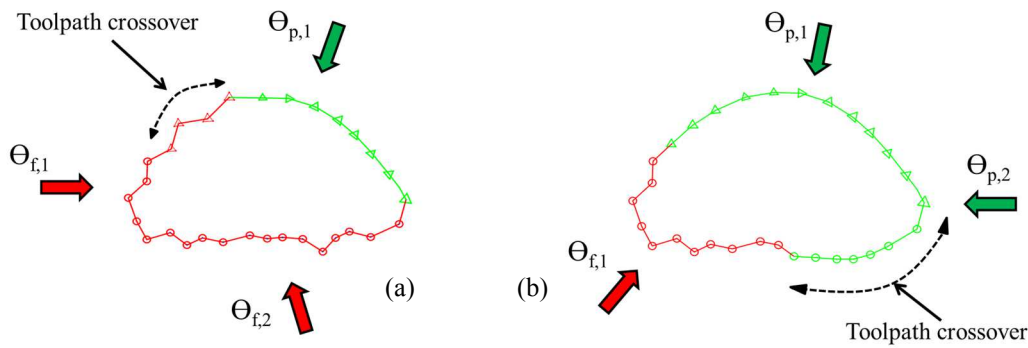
Illustration of tool path crossover (a) tool path crossover from fracture
